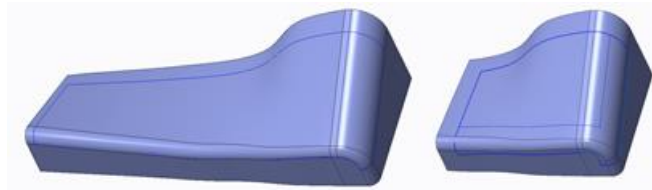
(a) Full tool surface. (b) Partial tool surface.
